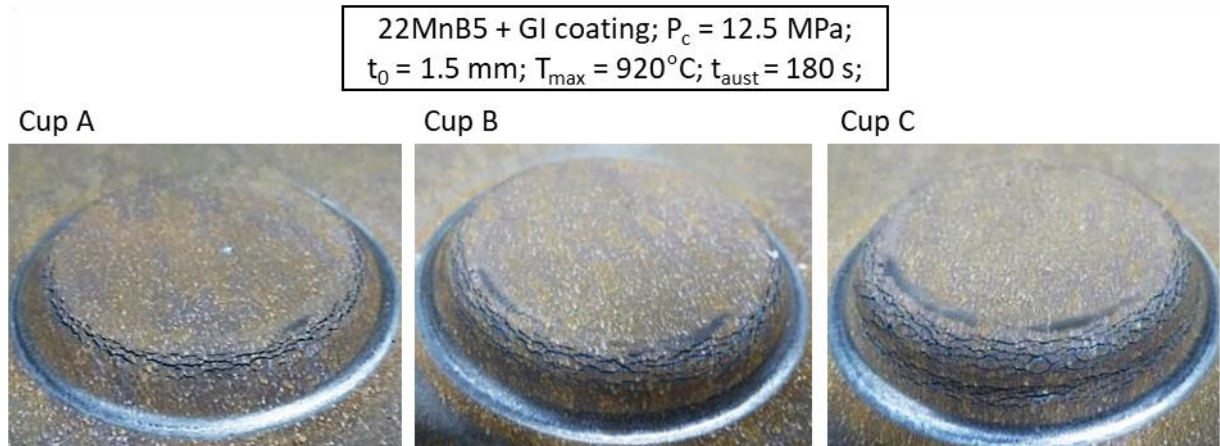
Surface appearance of cups A, B and C of a galvanized blank after direct hot stamping: cracking on the radii of the cups.
